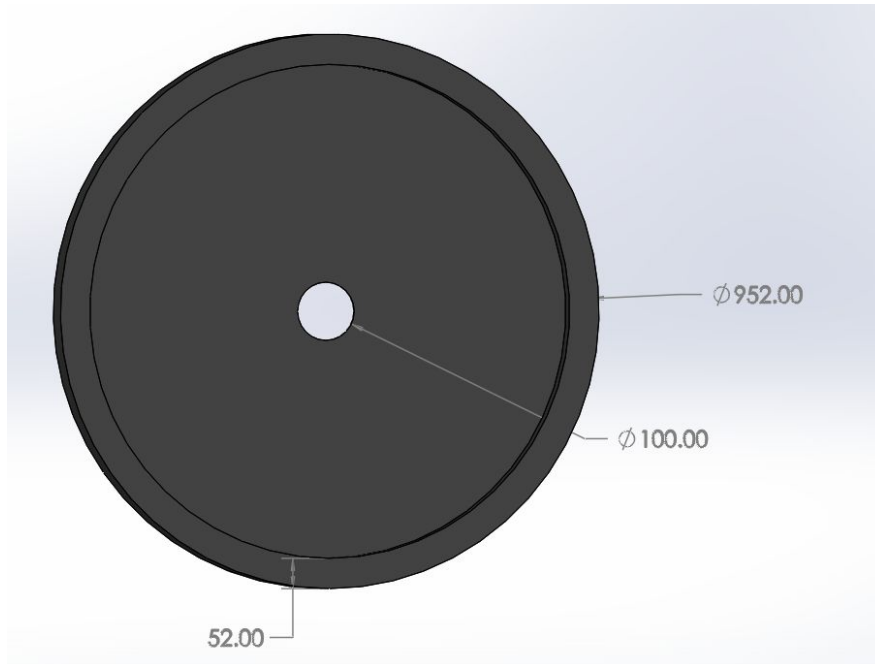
Model of Possible Flywheel Design (dimensions in mm)
